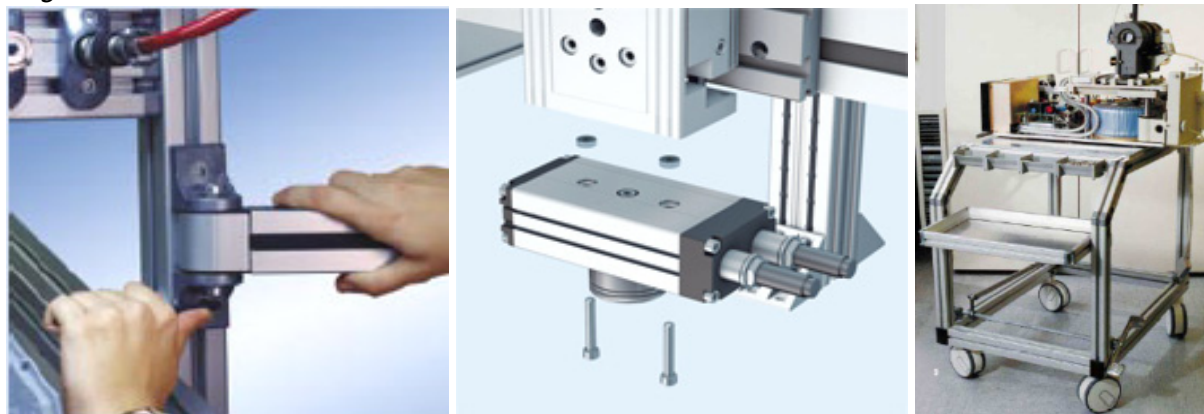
Example of quick-change fixture and casters on a machine stand [8]
